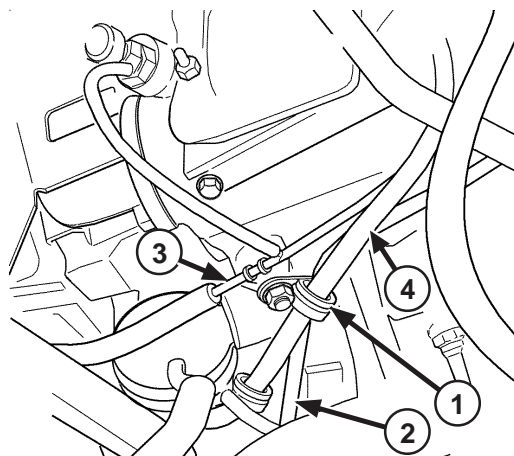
Fuel Line and Wiring Harness Clamps Removal
